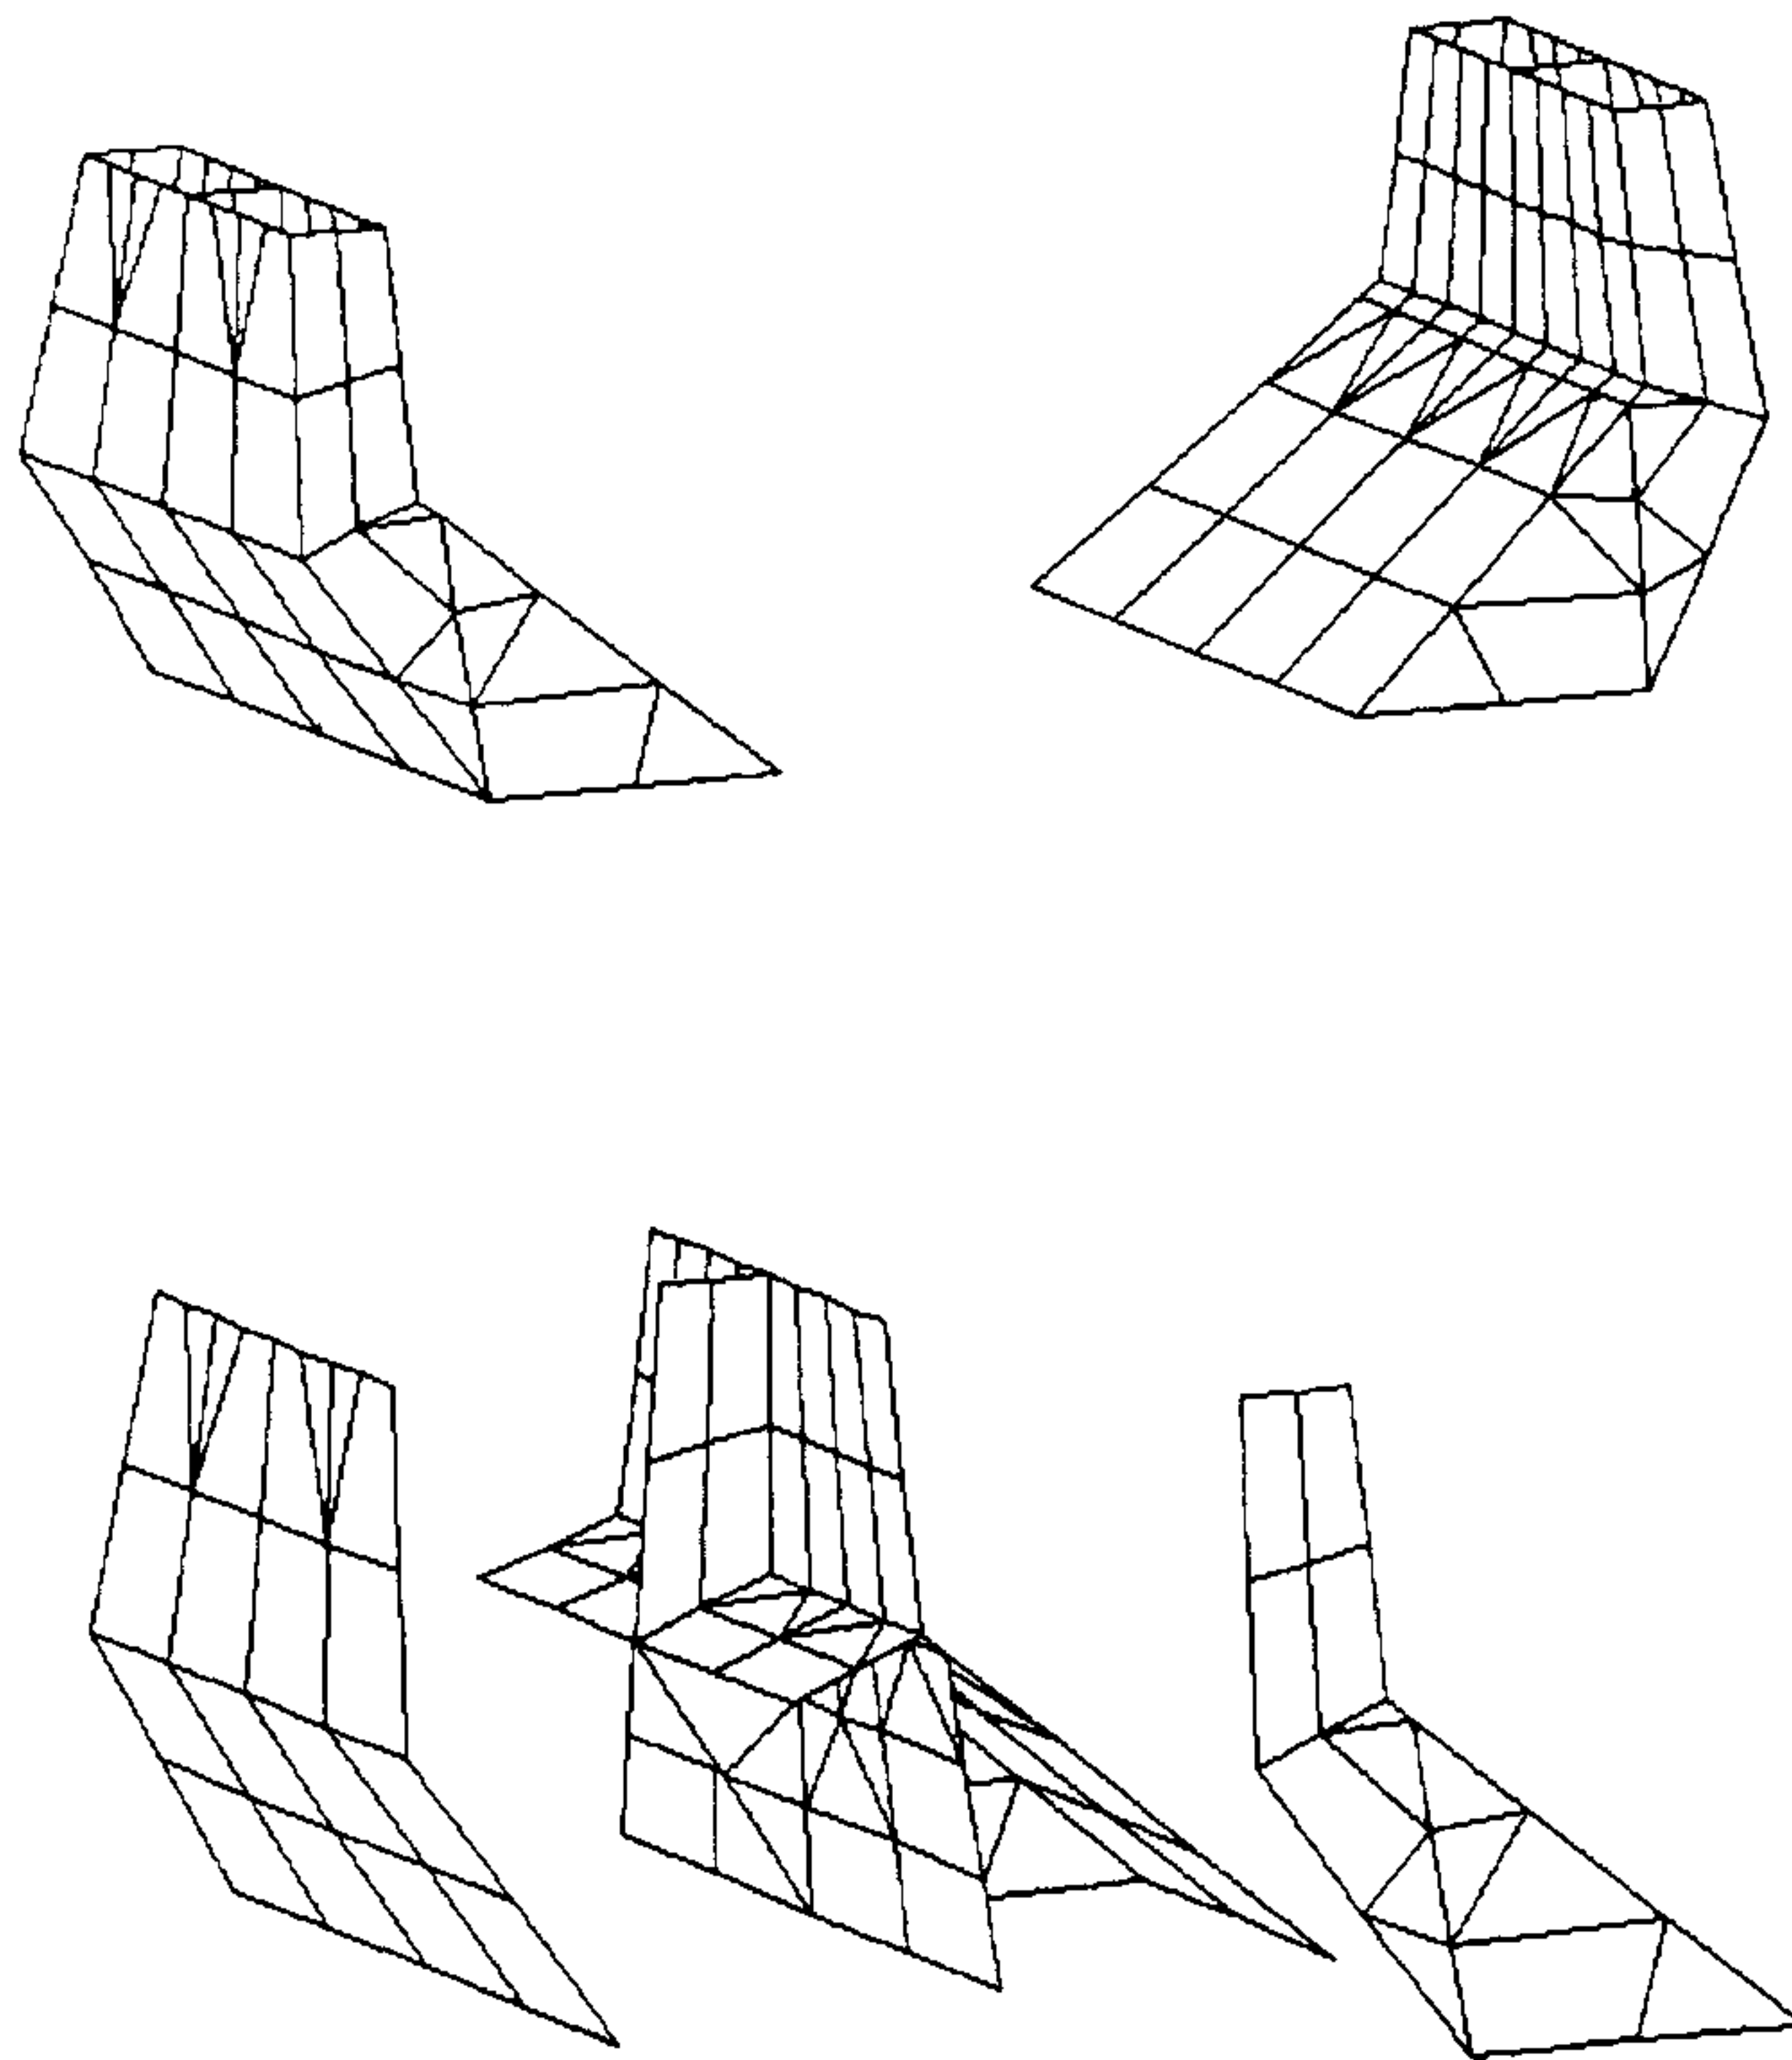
Exterior and exploded views of the fork tines. These are planned as being integral with the horizontal "throat" of the fork (also referred to as the "base") in a single weldment. All plates were modelled as 1/2" thick except the internal slanted plate tying the inner and outer plates at the "knee" of the bend, which was modelled as 3/4" thick.
